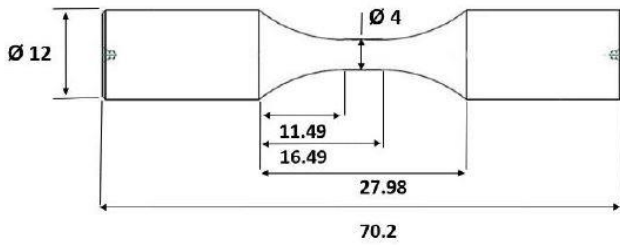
Specimen geometry used for the experiments (all dimensions in mm)
